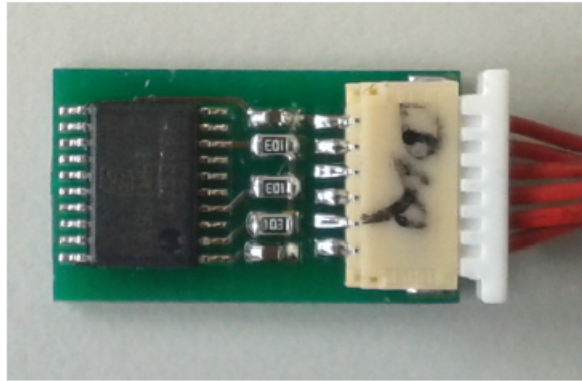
Circuit board with the spring displacement sensor, the AS5306 from AMS.
